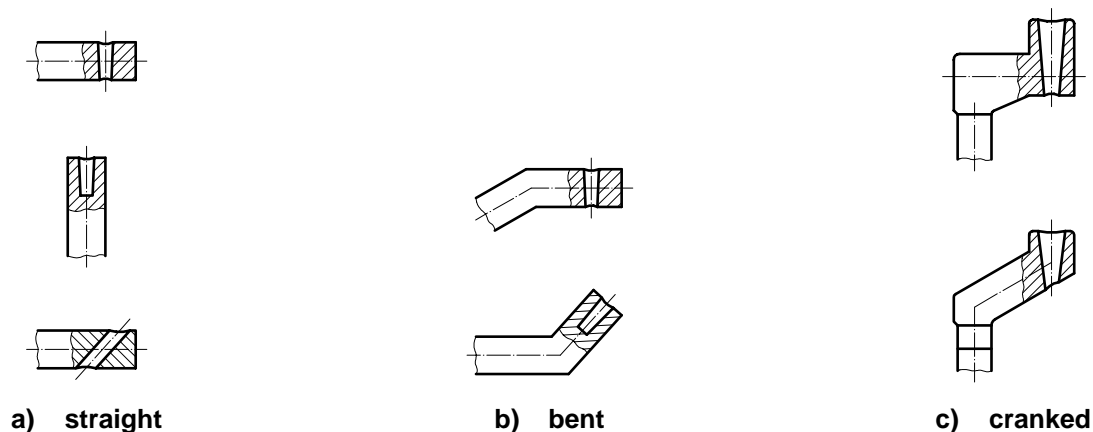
Electrode holders with female taper for spot welding electrodes (fluid cooling is not illustrated)
